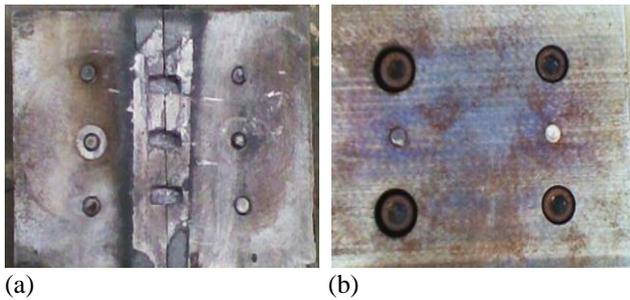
Die Steel Substrate (a) front view, (b) rear view
